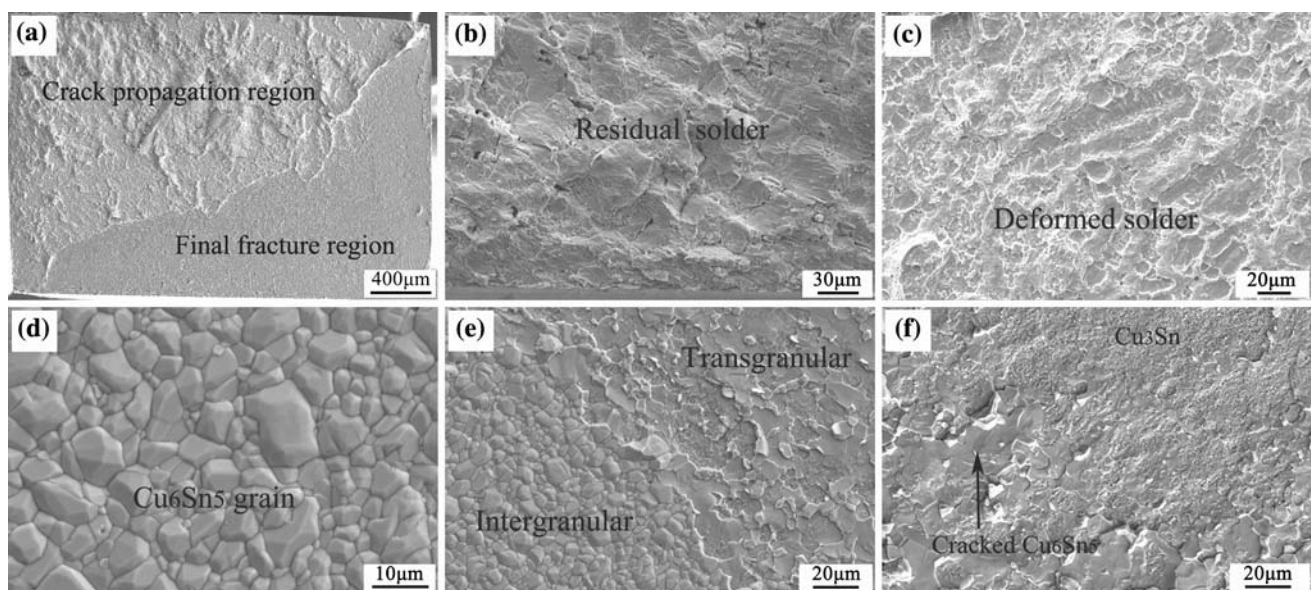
Fatigue fracture surface. (a) Macroscopic image; (b) fractography morphologies, showing fatigue crack origin; (c) region of fatigue crack propagation, with deformed solder; (d) inter-granular fatigue fracture along the Cu₆Sn₅/solder interface; (e) transition region from inter-granular to trans-granular fatigue fracture; (f) trans-granular fracture along the Cu₆Sn₅/Cu₃Sn interface.
